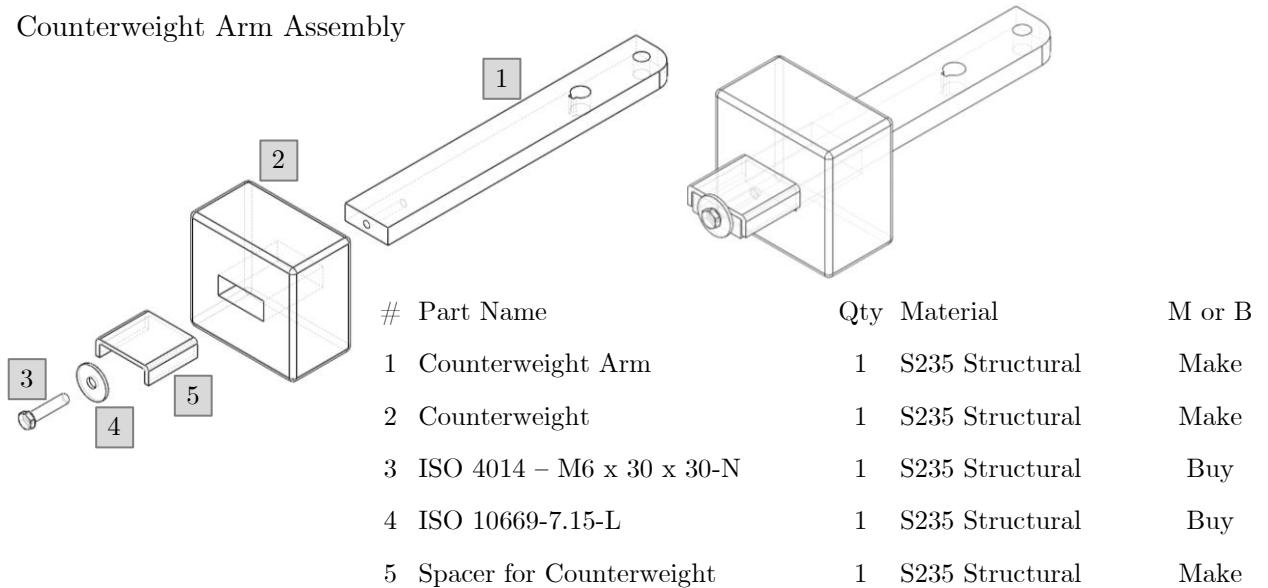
Isometric views of exploded and assembled counterweight assembly with bill of materials
